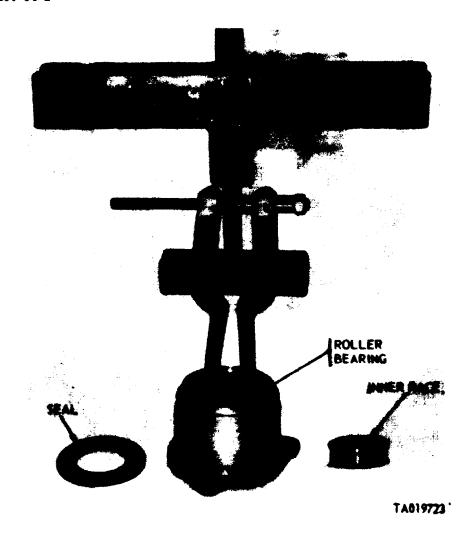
Removal of MS19078-12 roller bearing from retainer using puller with Slide-hammer attachmentfrom kit 5120-00-423-1596.
